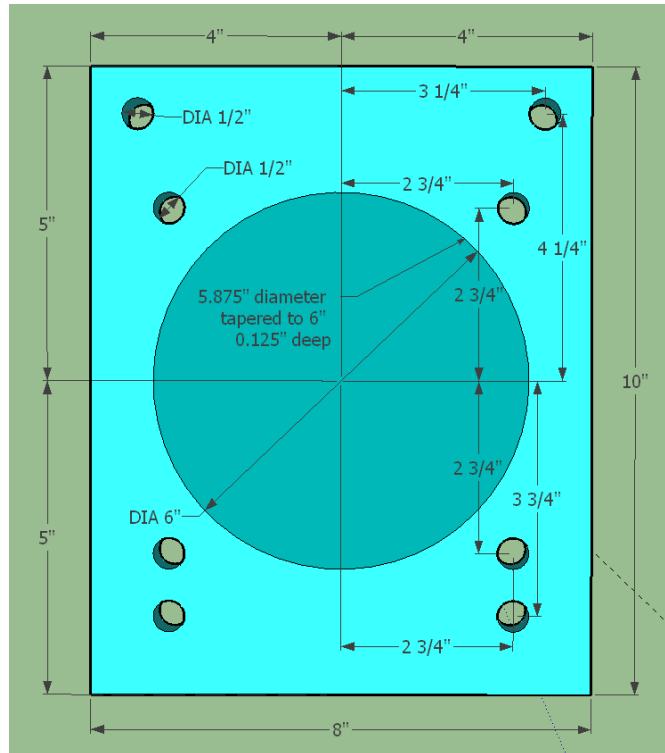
DST Sides-Plate of C6 specimens – Aluminum 1/2" thick.
